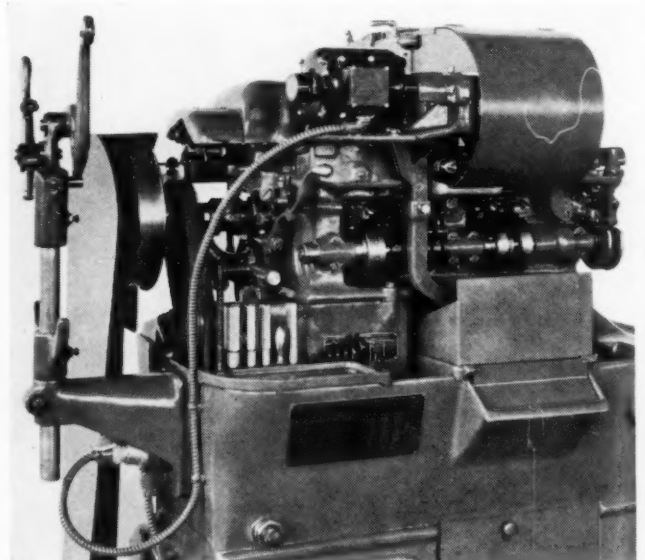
MOTOR-DRIVEN SCREW-SLOTING ATTACHMENT ON AN AUTOMATIC SCREW MACHINE
